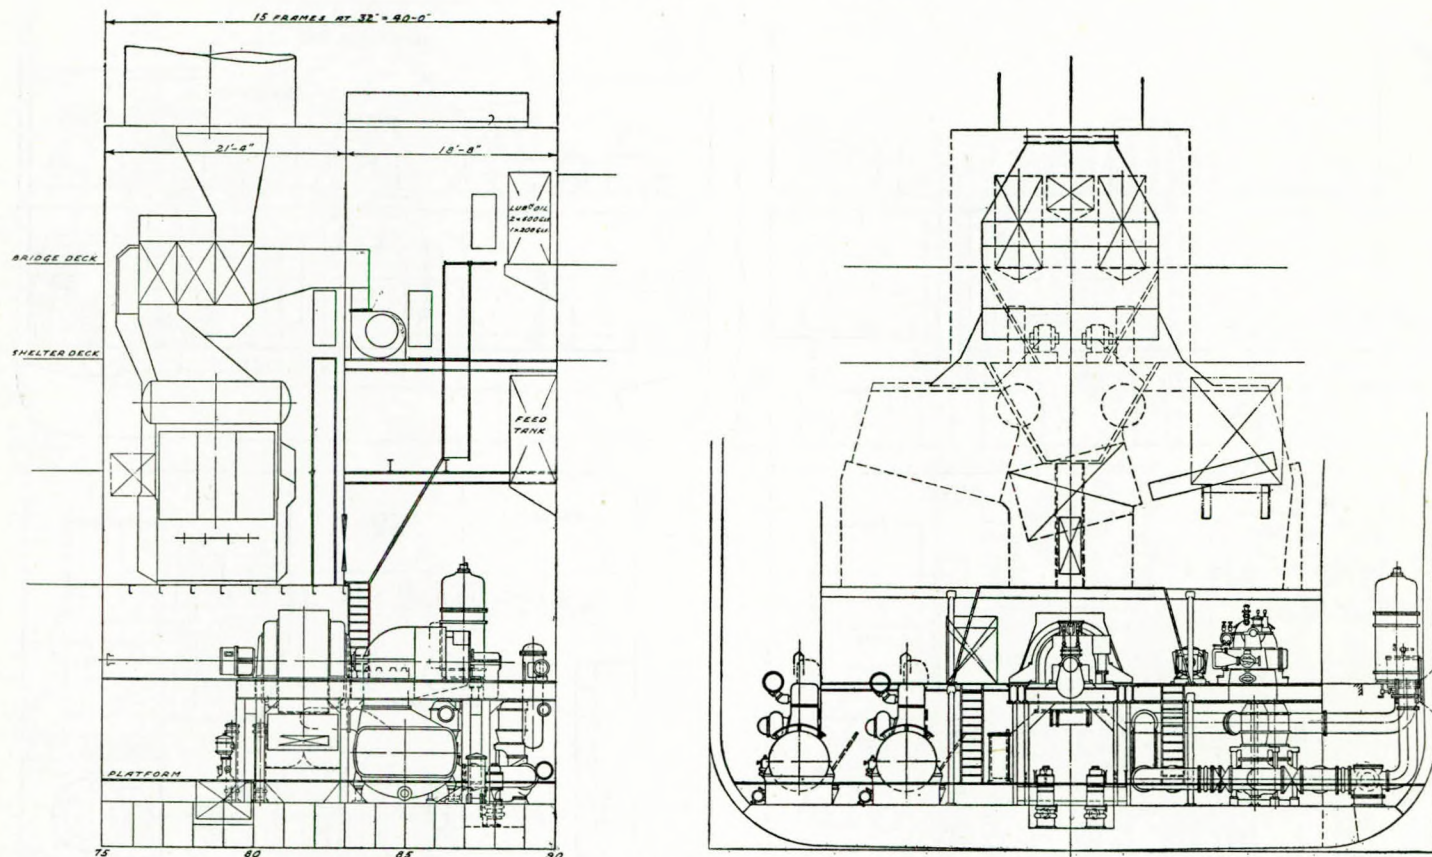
Arrangement of machinery for 8,000-s.h.p. turbo-electric cargo ship.
